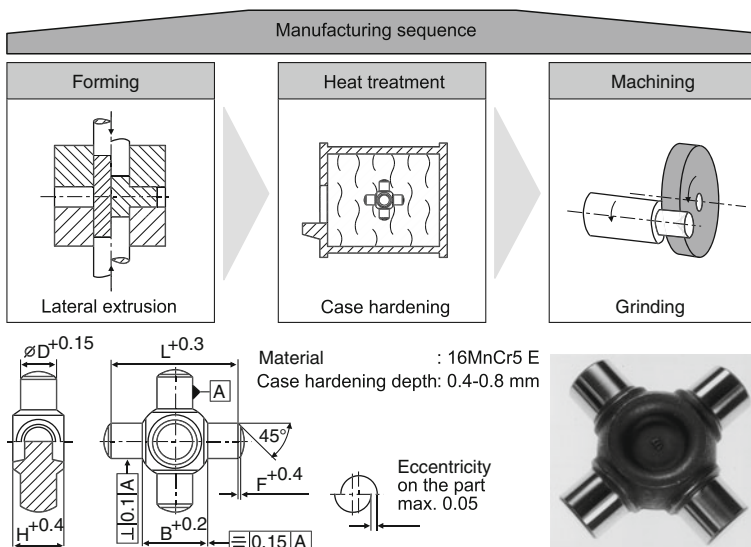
Example of a near-net-shape manufacturing [NN87]
